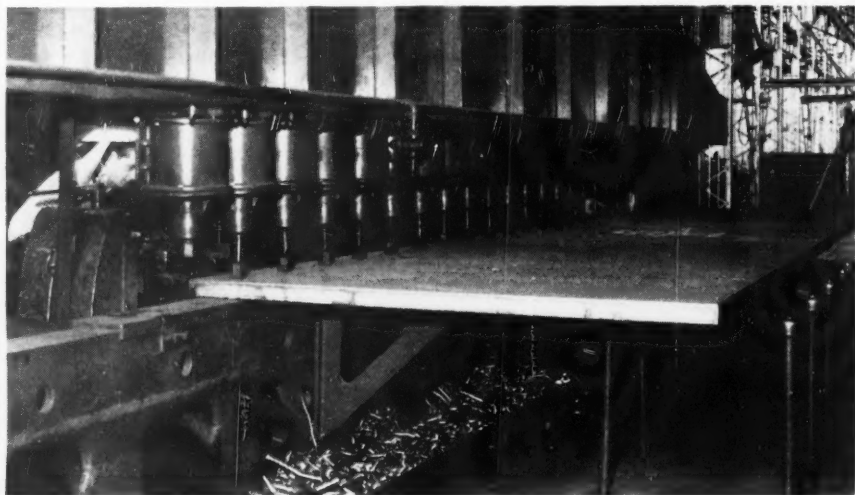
Large plate-planer shown here is used for beveling edges of flat sheet stock.
